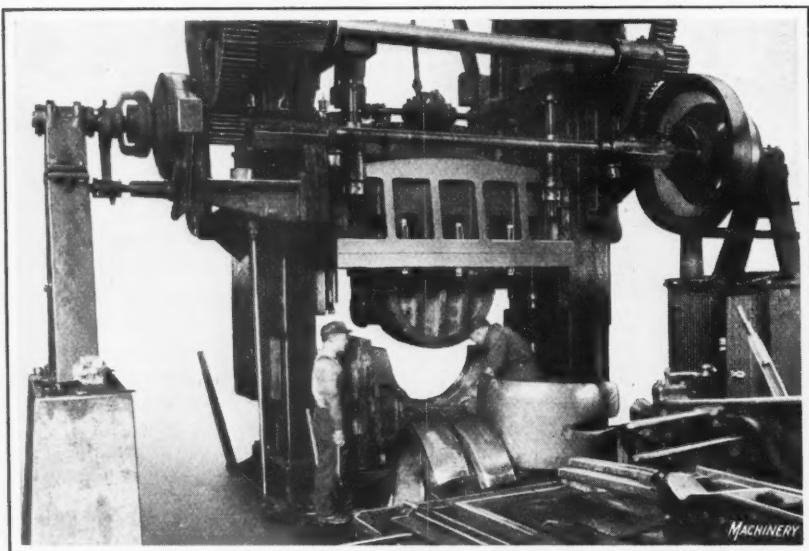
Another Large-sized Toggle Drawing Press making Mud Guards
